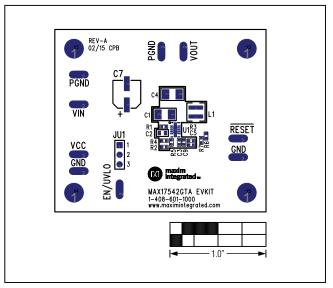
MAX17542G 3.3V Output EV Kit Component Placement Guide—Component Side
